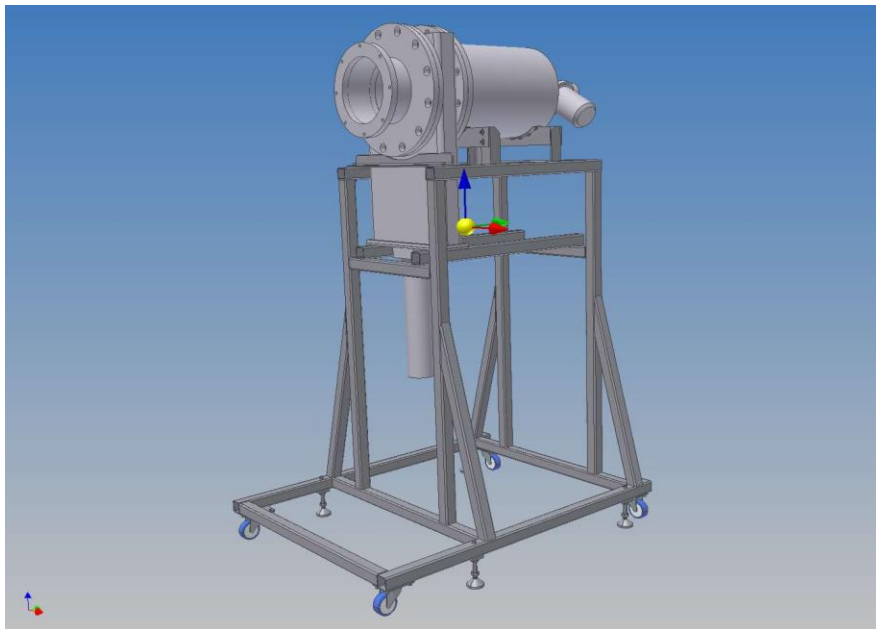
The Cryogenic head, the gate valve and the flange adaptor mounted on the designed support.
